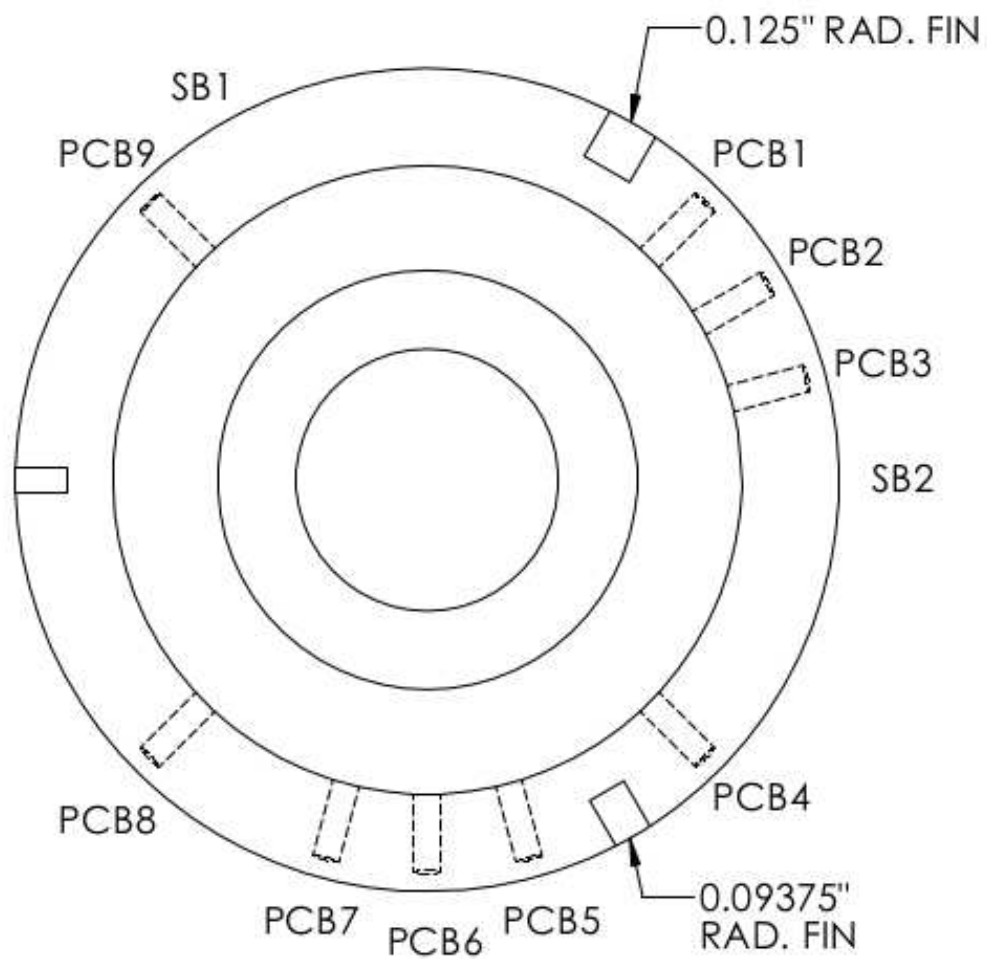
Entry 3 PCB and SB locations. View from back end of cone.
